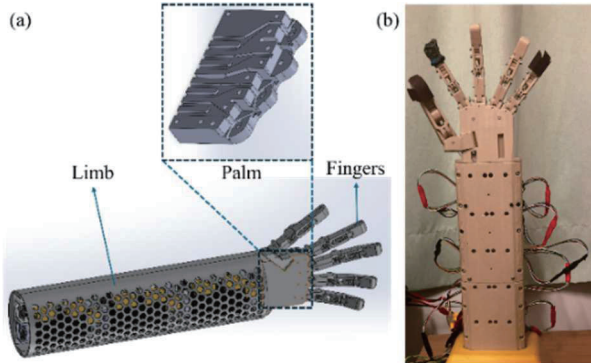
(a) Design and (b) prototype of the overall robotic hand structure
